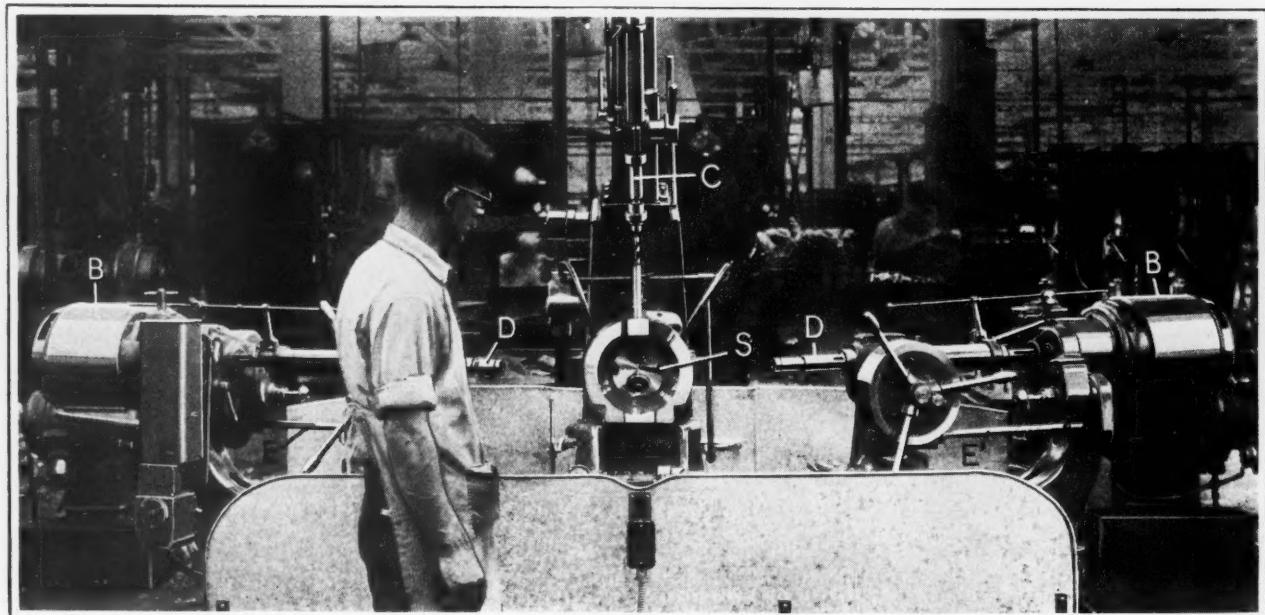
Special Machine for Drilling, Counterboring, and Tapping the Priming and Spark-plug Holes
